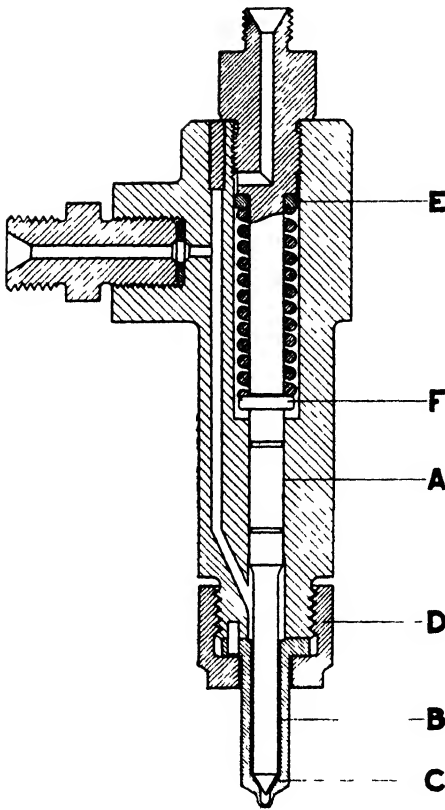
SECTIONAL VIEW OF SIMMS REMOTE SEAL ATOMISER, TYPE AB
